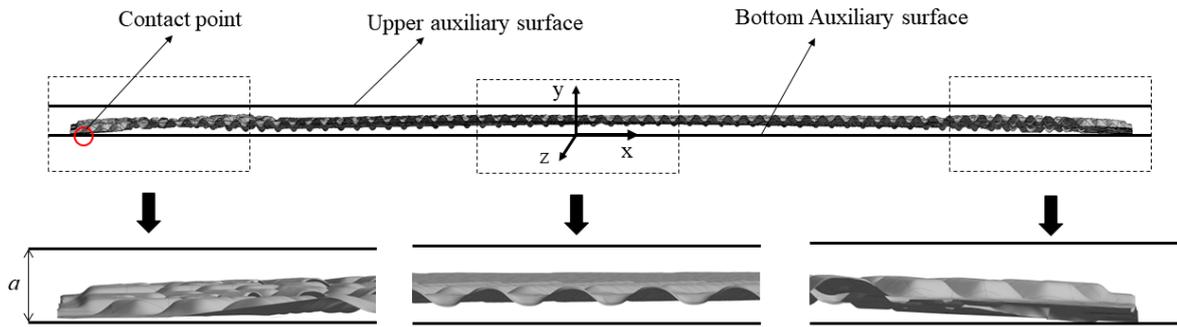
Schematic of the flat surfaces for corrugated surface alignment.
